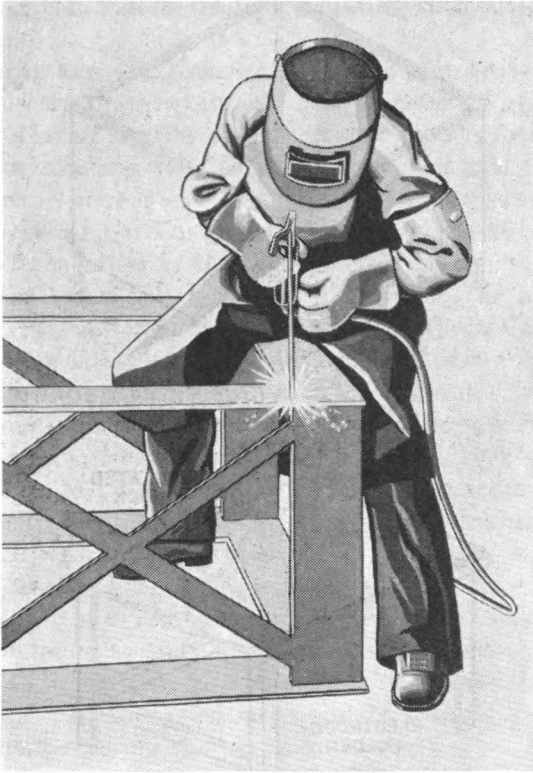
Operator properly clothed for arc welding.
